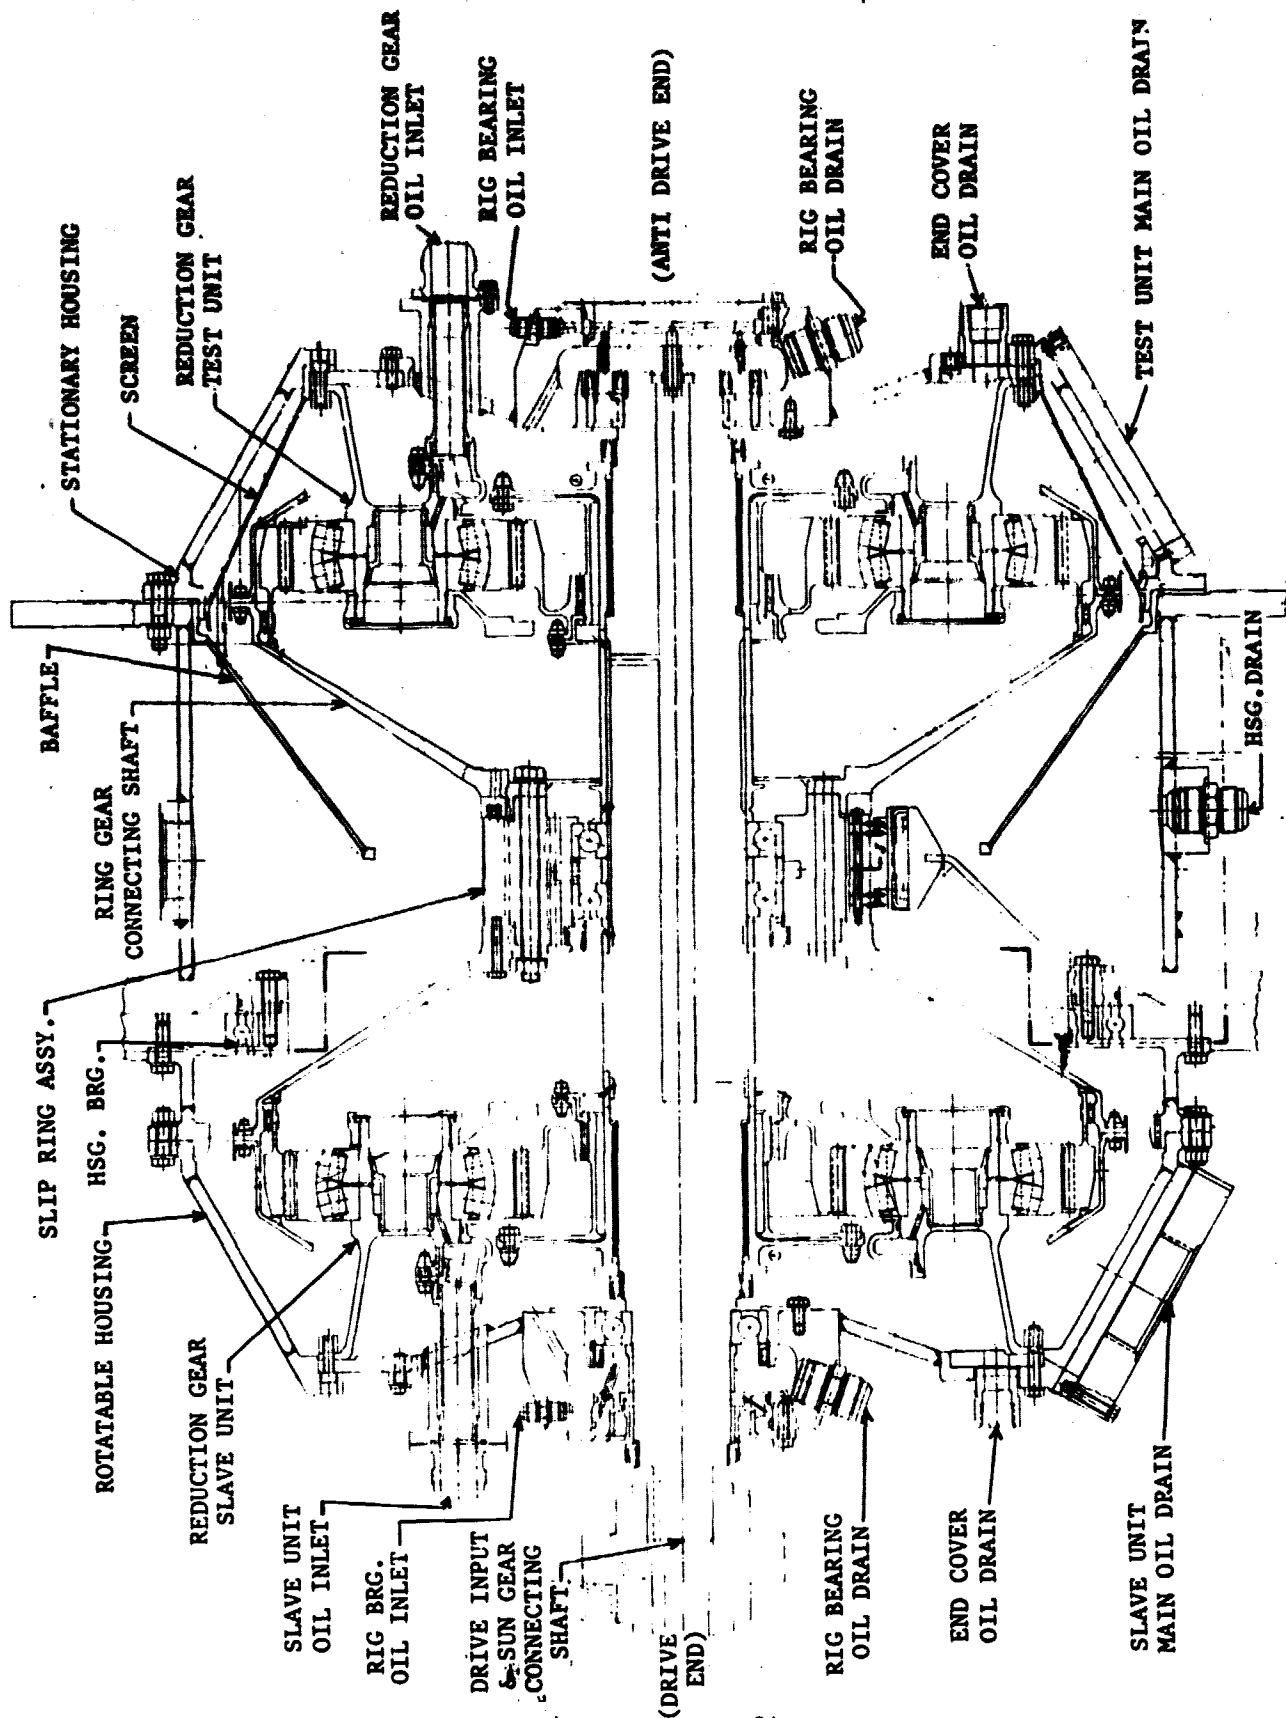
QCSEE Main Reduction Gear Back-to-Back (Hopkinson) Test Rig (Section View)
